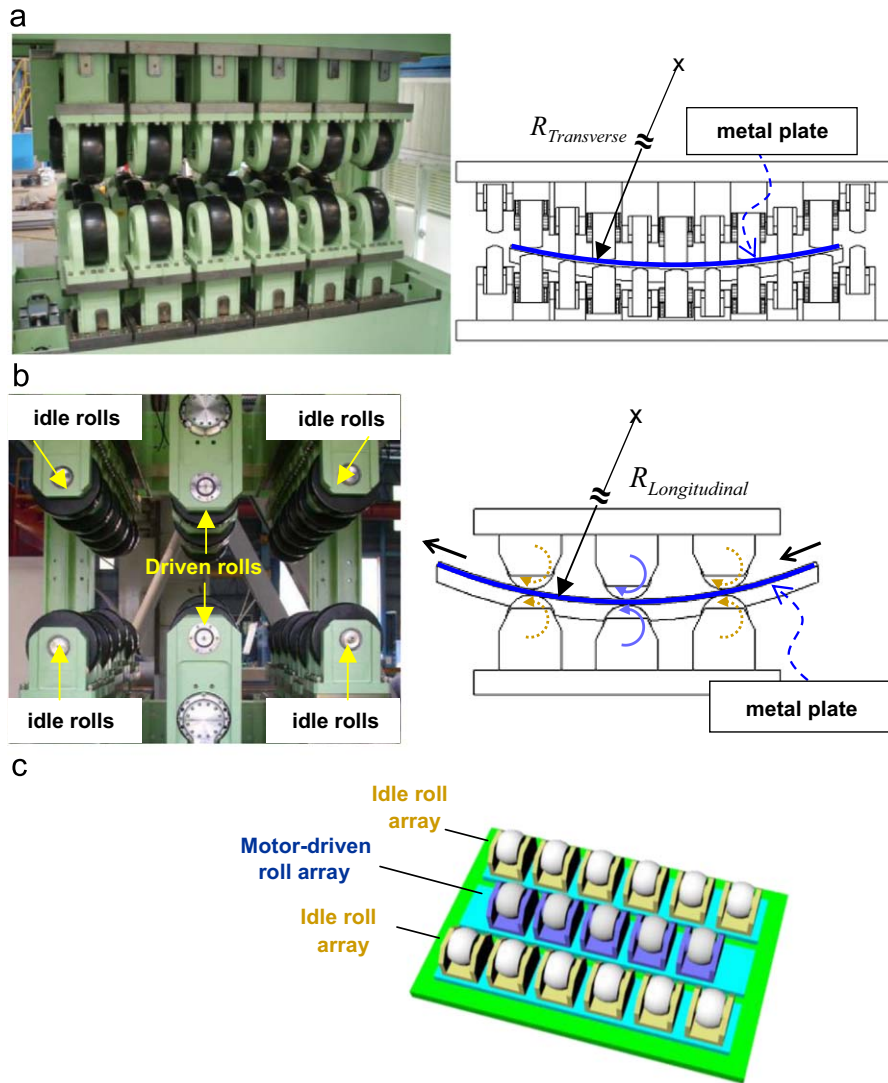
The prototype line array roll set (a) front view: transverse bending, (b) side view: longitudinal bending, and (c) lower roll set.
